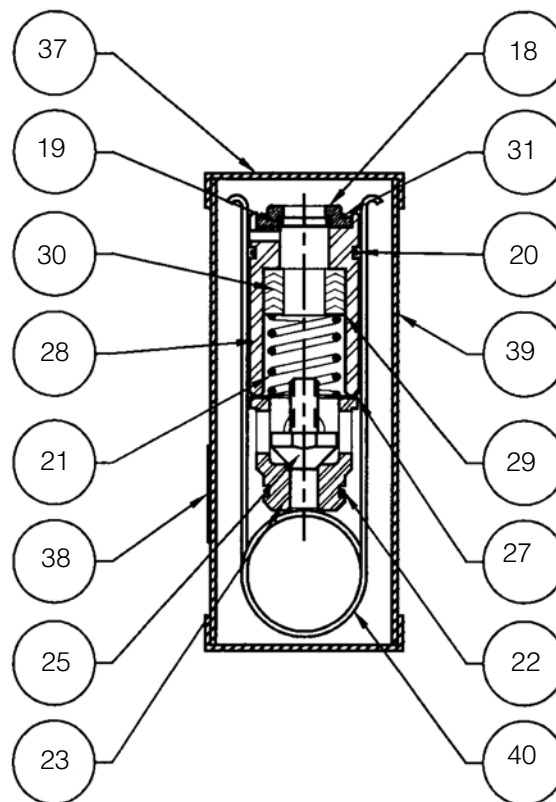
Replacement Packing and Trim Assemblies for Metal Seated Constructions
